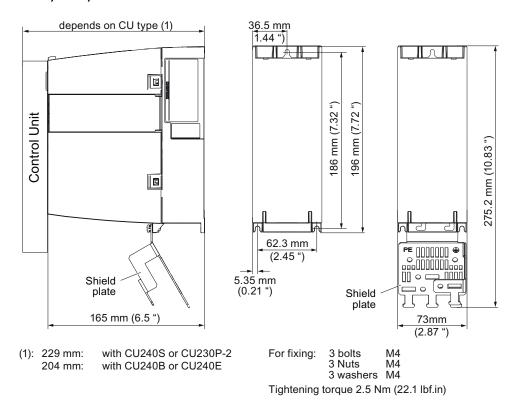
Dimensions and drill pattern for Power Module PM240, FSA, IP 20
